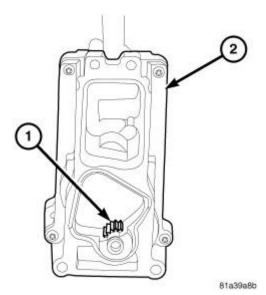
Turbocharger Actuator Gear & Housing Courtesy of CHRYSLER GROUP, LLC
